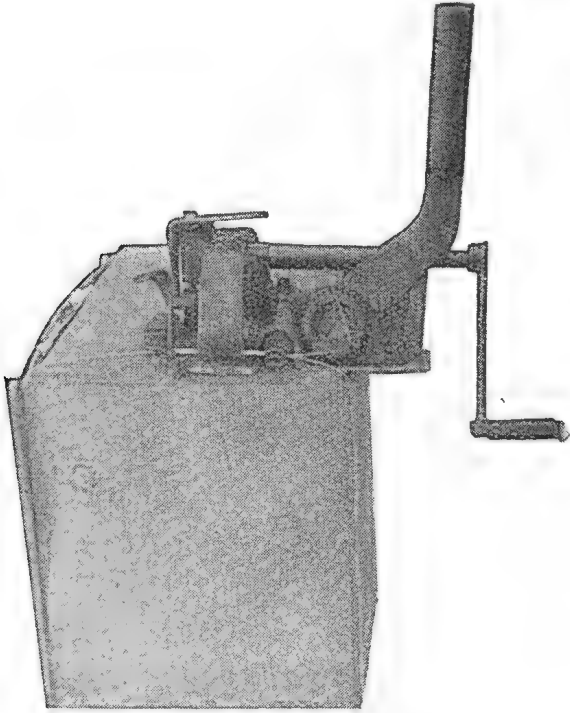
METHOD OF PLACING WIRING MACHINE.
